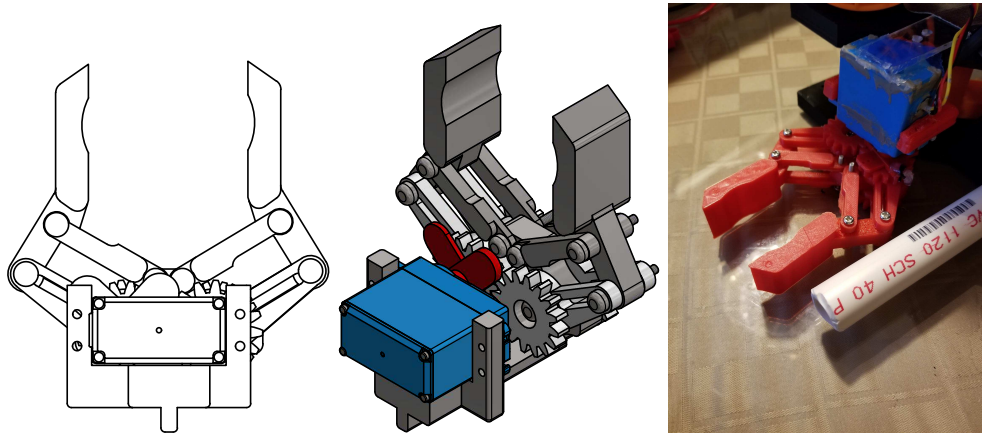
CAD drawing and assembled model of Nemo's primary gripper
